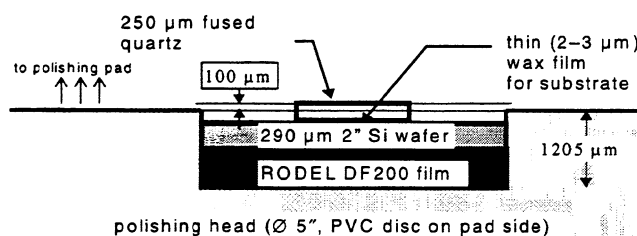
Schematic view of wafer pocket with wax mounting of substrate
